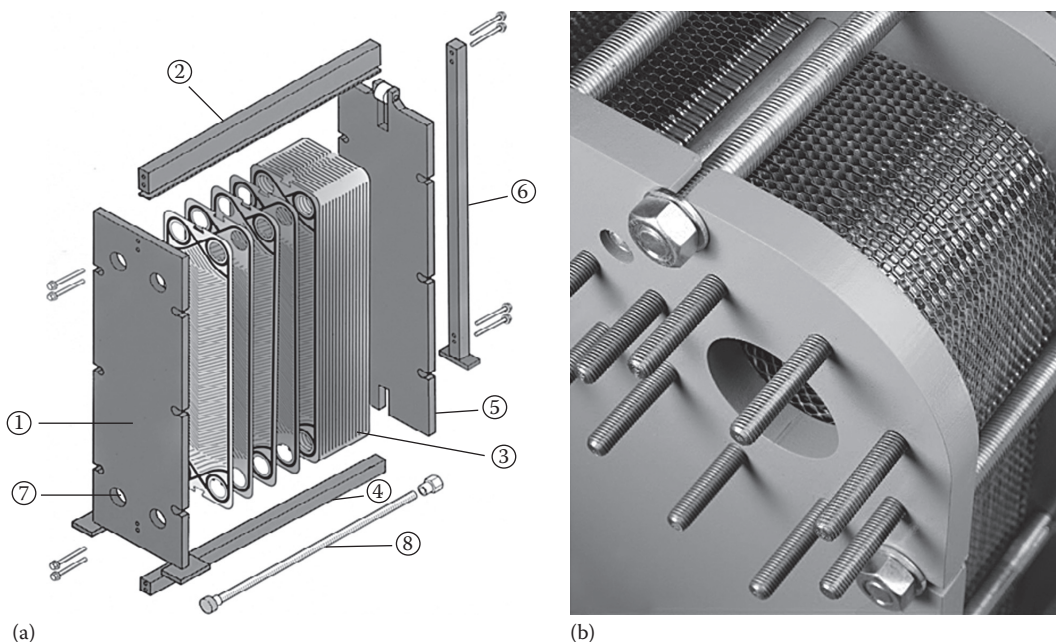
Plate heat exchanger. (a) Construction details—schematic (Parts details: 1, Fixed frame plate; 2, Top carrying bar; 3, Plate pack; 4, Bottom carrying bar; 5, Movable pressure plate; 6, Support column; 7, Fluids port; and 8, Tightening bolts.) and (b) closer view of assembled plates. (Courtesy of ITT STANDARD, Cheektowaga, NY.)
